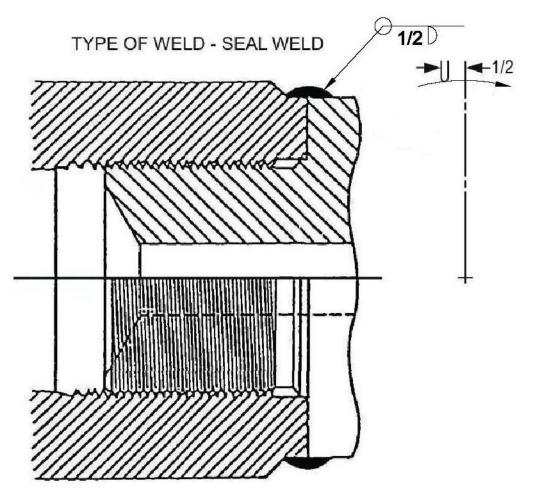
Assembly of seal welded inlet/drain plug.
